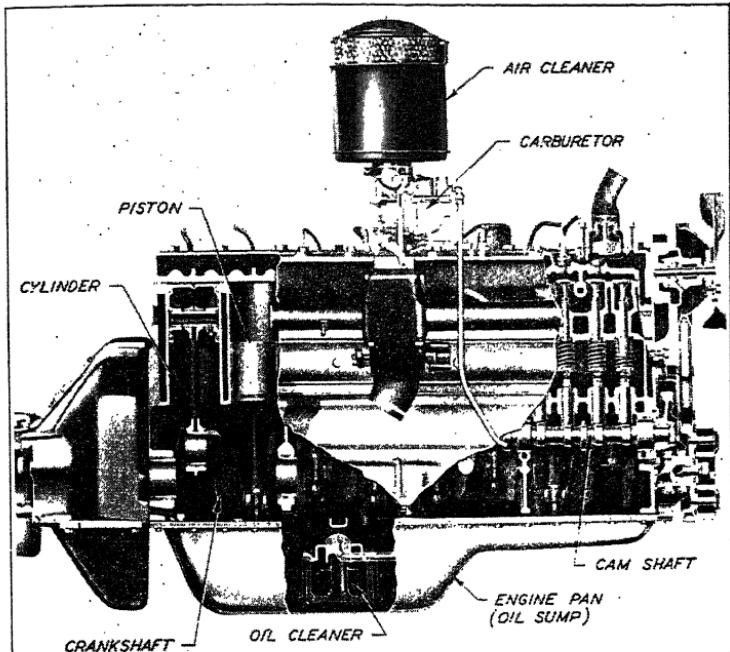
Sectioned View of Pontiac 8-Cylinder Engine; Oil Filter Built Into Oil Pan
